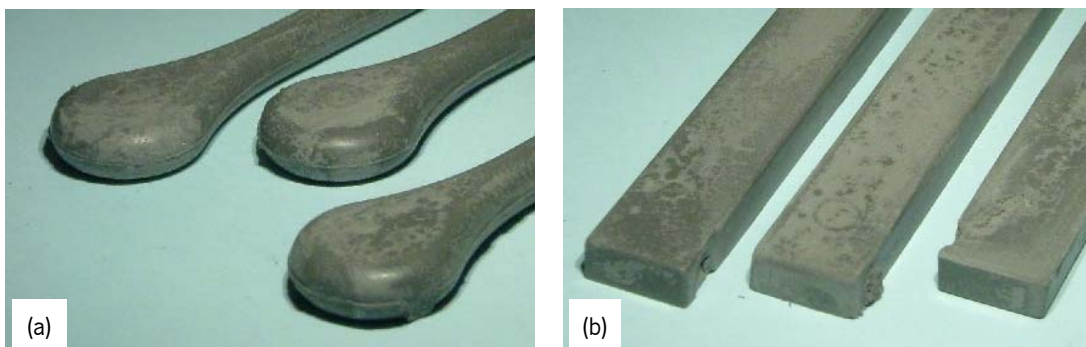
Surface conditions of inadequate injection moulded parts - (a) tensile specimens, (b) flexure specimens.
